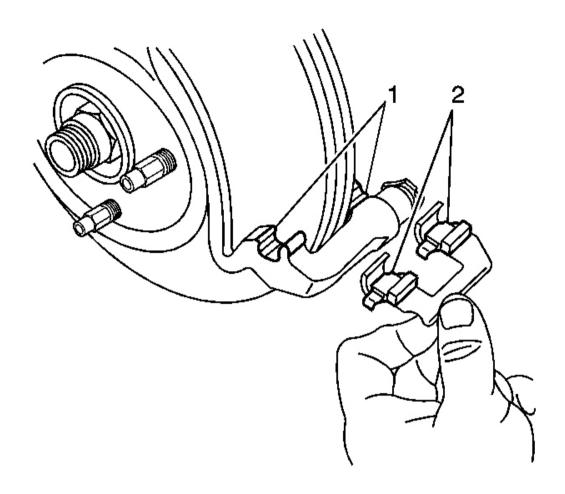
Removing/Installing Brake Pad Retainers Courtesy of GENERAL MOTORS CORP.
